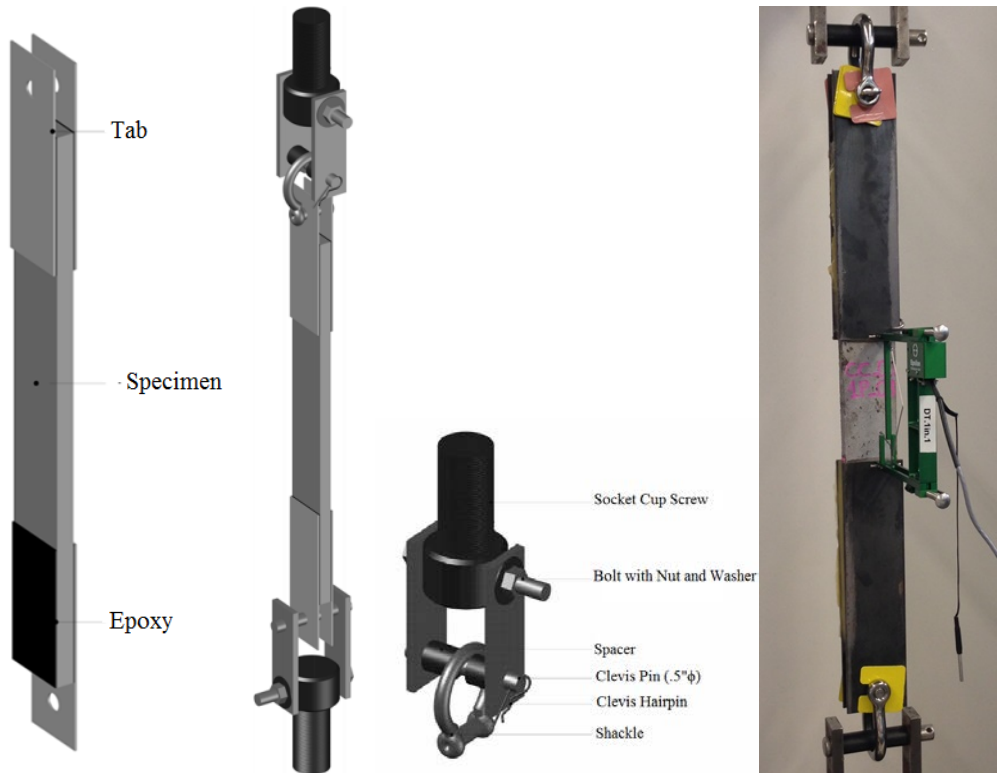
Specimen test setup with clevis grips and extensometer
